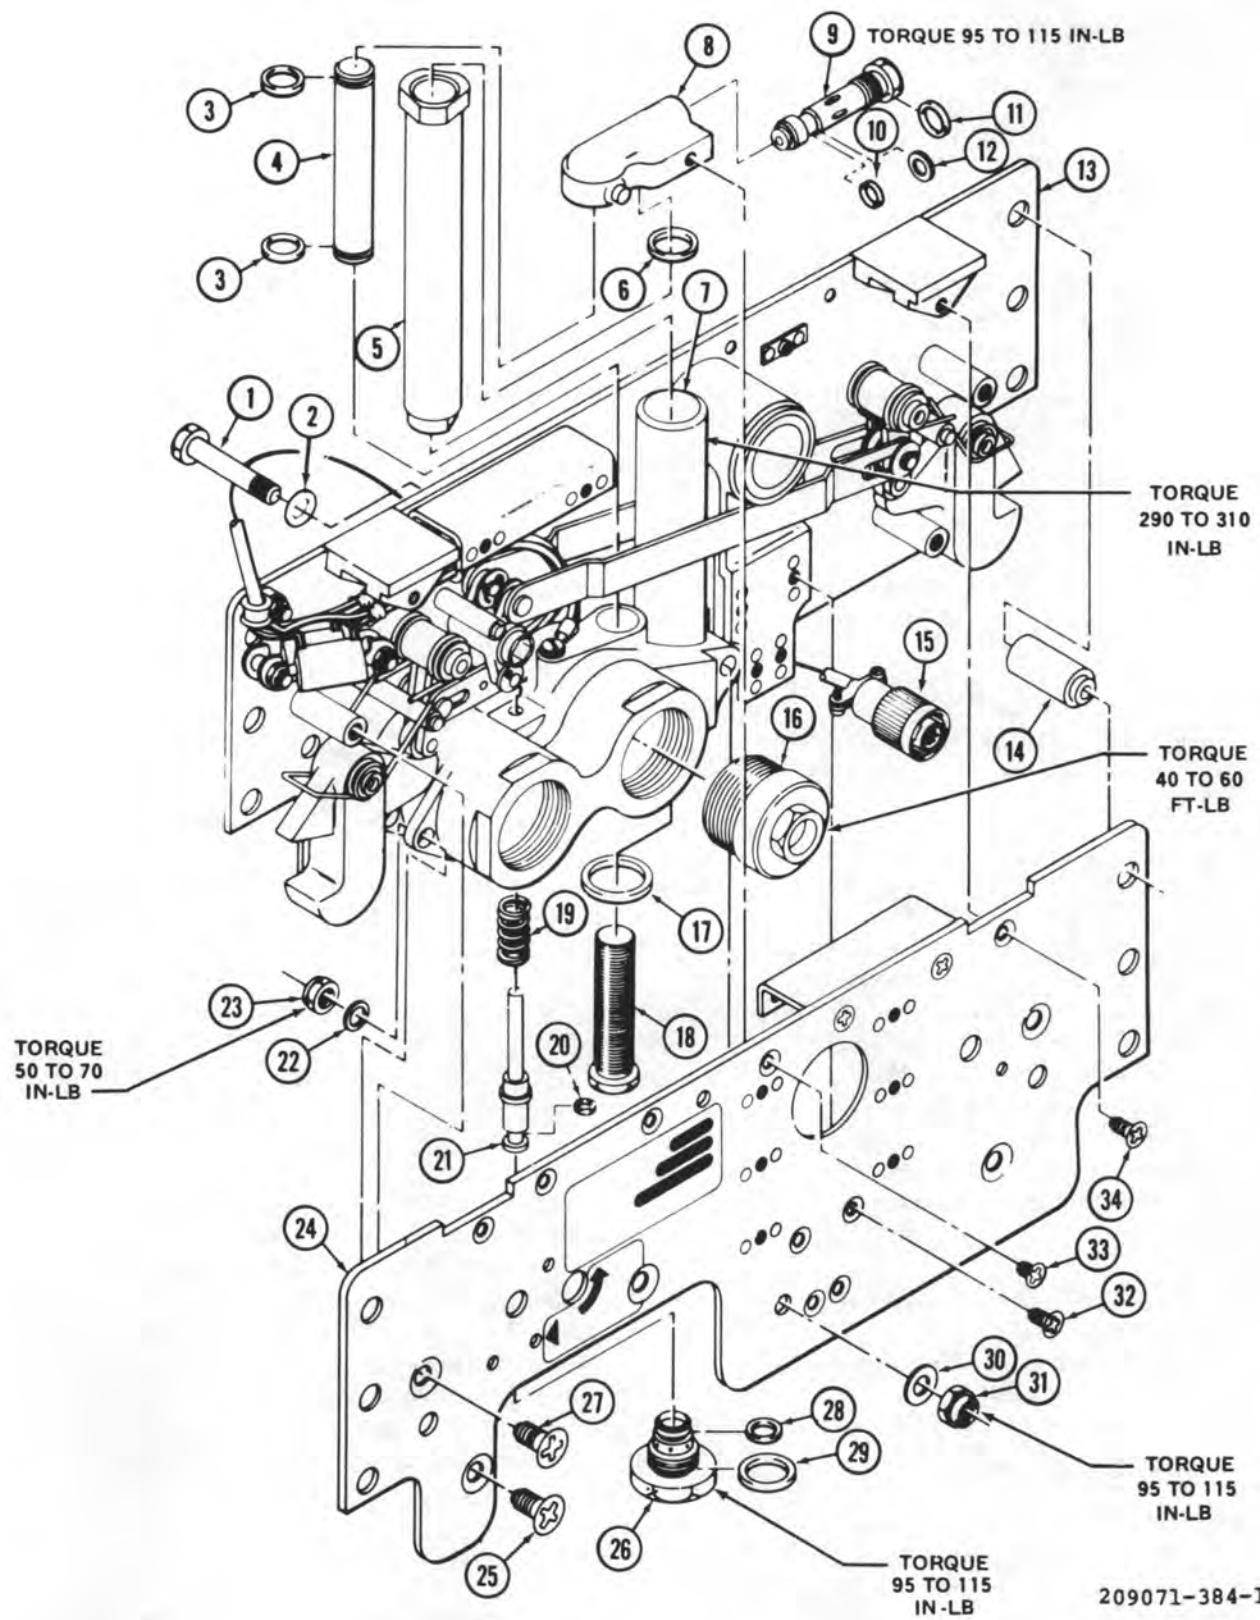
Outboard Ejector Rack Assembly (Sheet 1 of 2)
